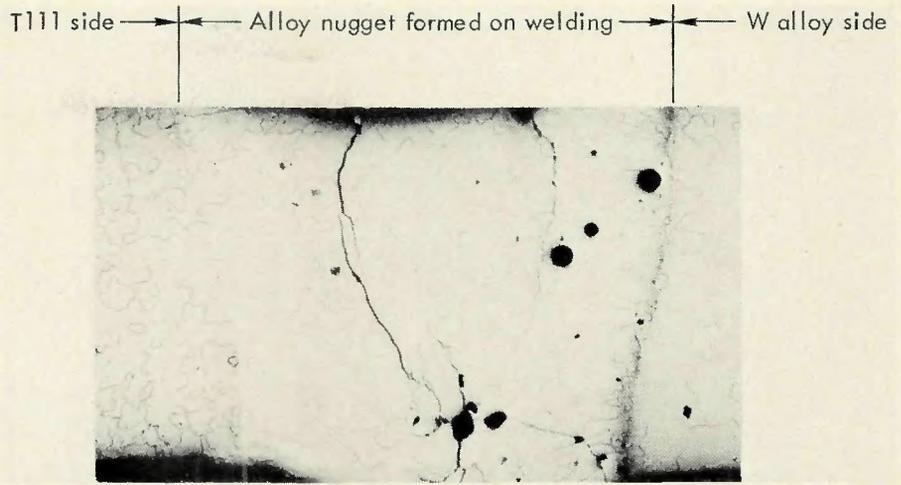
Polished and cathodically etched transverse section of weld nugget made directly between W-25 at.% Re-30 at.% Mo and T111; 60X
